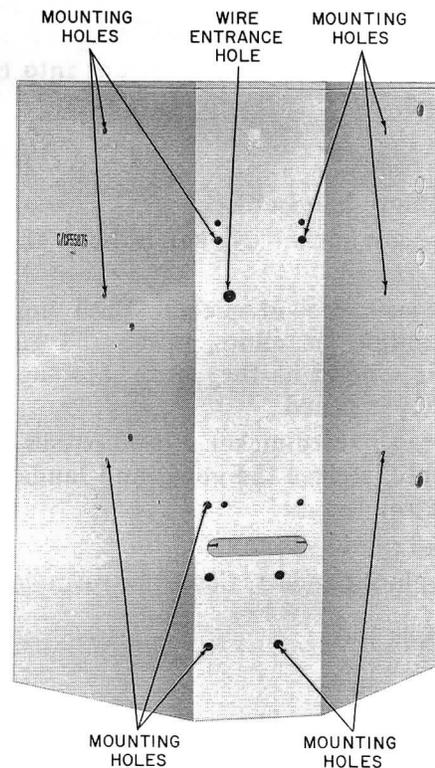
Location of Mounting Holes and Wire Entrance Hole
